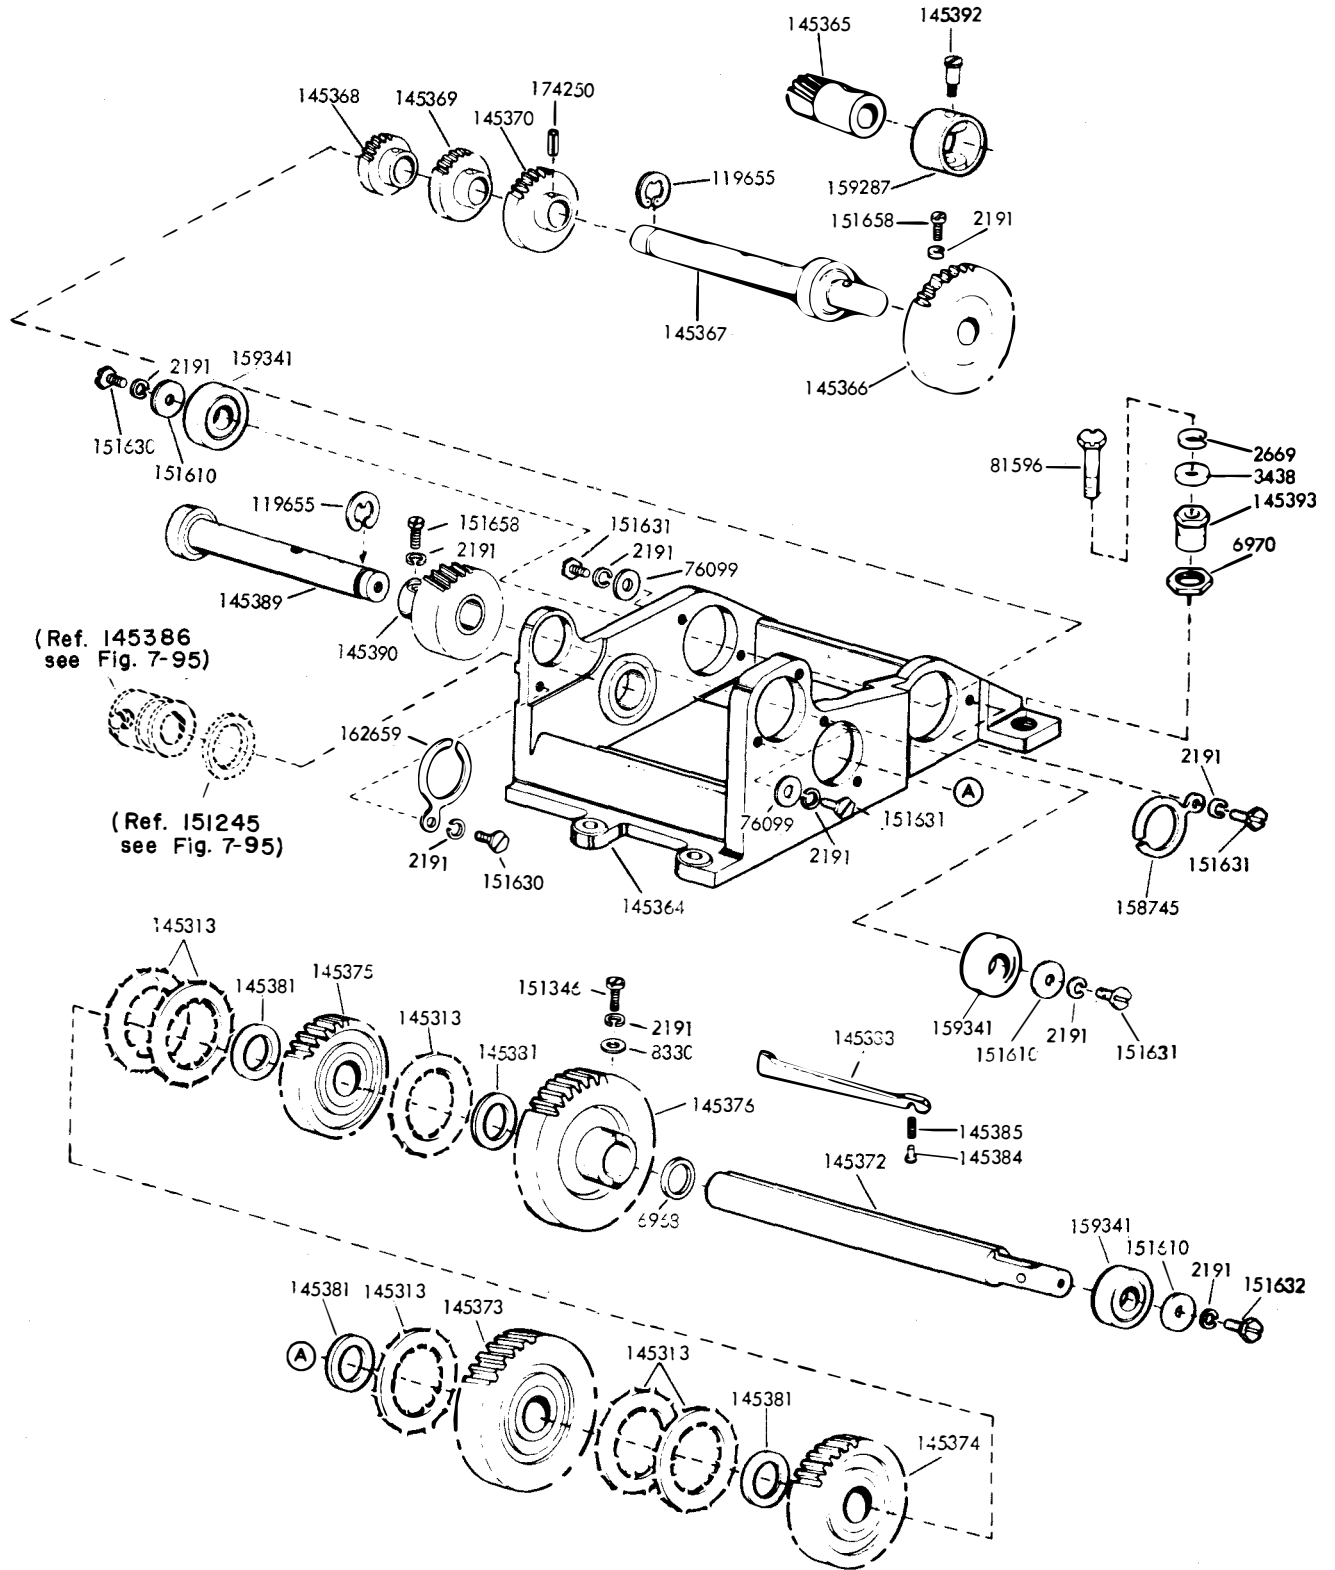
Gearshift Mechanism for Tape Printer Keyboard Base - Used on High-Level Sets (Sheet 1 of 2)
